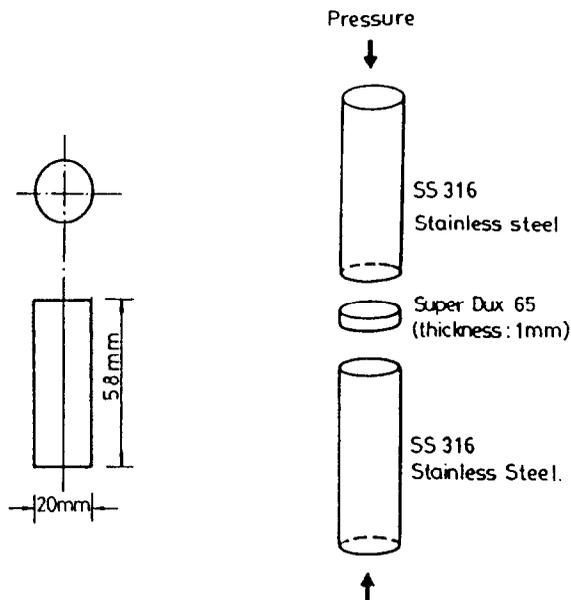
The dimension and joint configuration for tensile specimens assembly.
